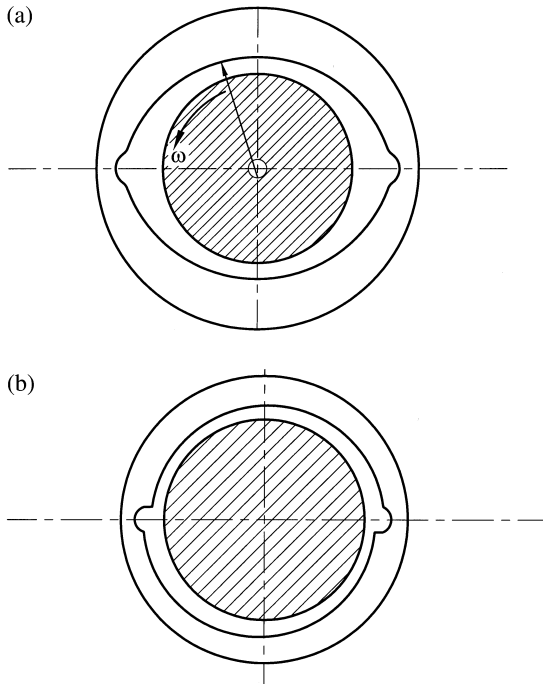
Elliptical bearing: (a) basic bearing design; (b) shifted bearing.
